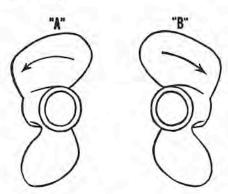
Before disassembling the direct drive lower unit, check to see if it is Standard Rotation (A) or Counter Rotation (B).
